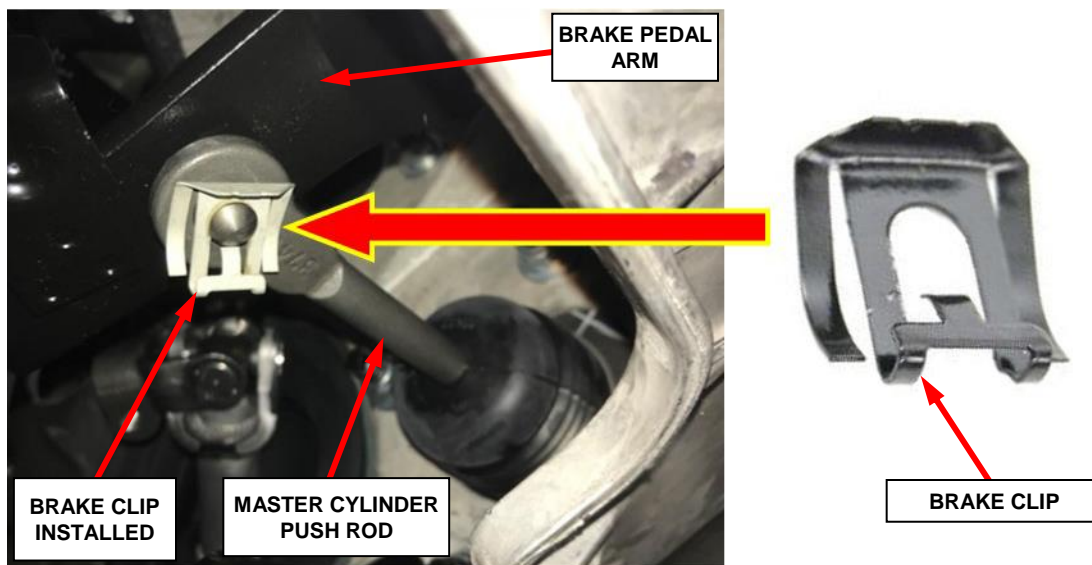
Install Clip Securing the Brake Master Cylinder Push Rod to the Brake Pedal Arm
